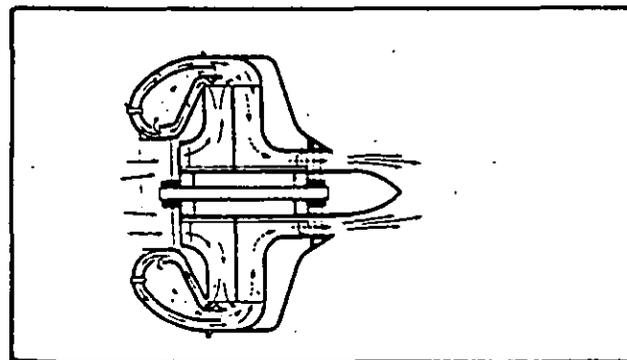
Patent drawing of Hahn showing combustor located in front of centrifugal compressor.
